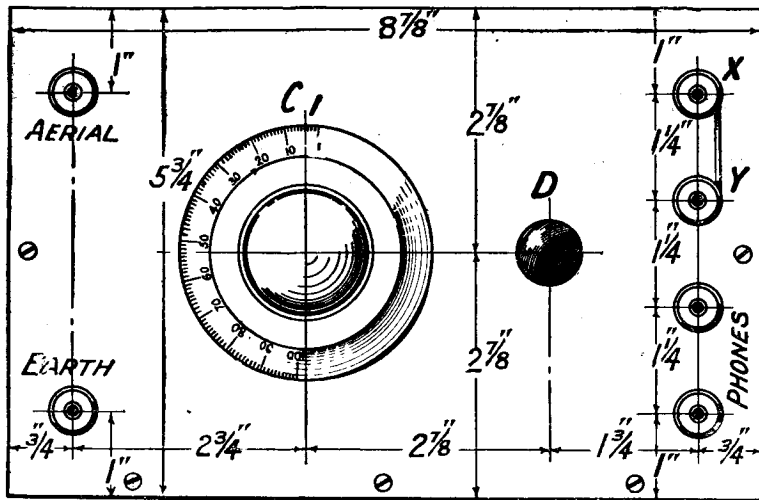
All dimensions are clearly marked in this layout of the front of the receiver. Free Blueprint No. 174a.
